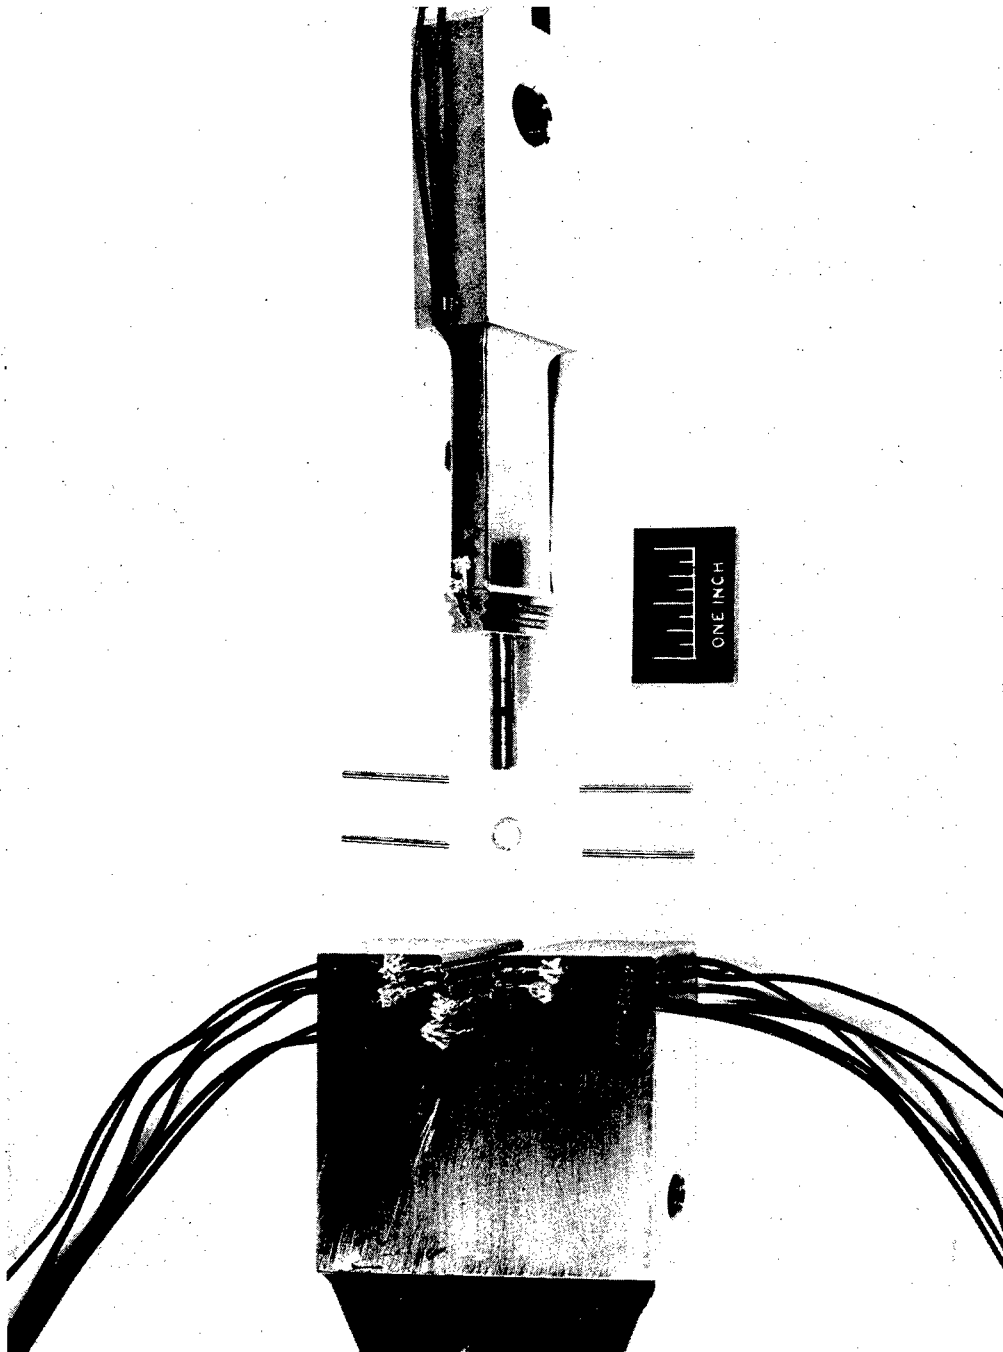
Blade-to-Disc Pinned Attachment and Fuel Seal Test Specimen.
